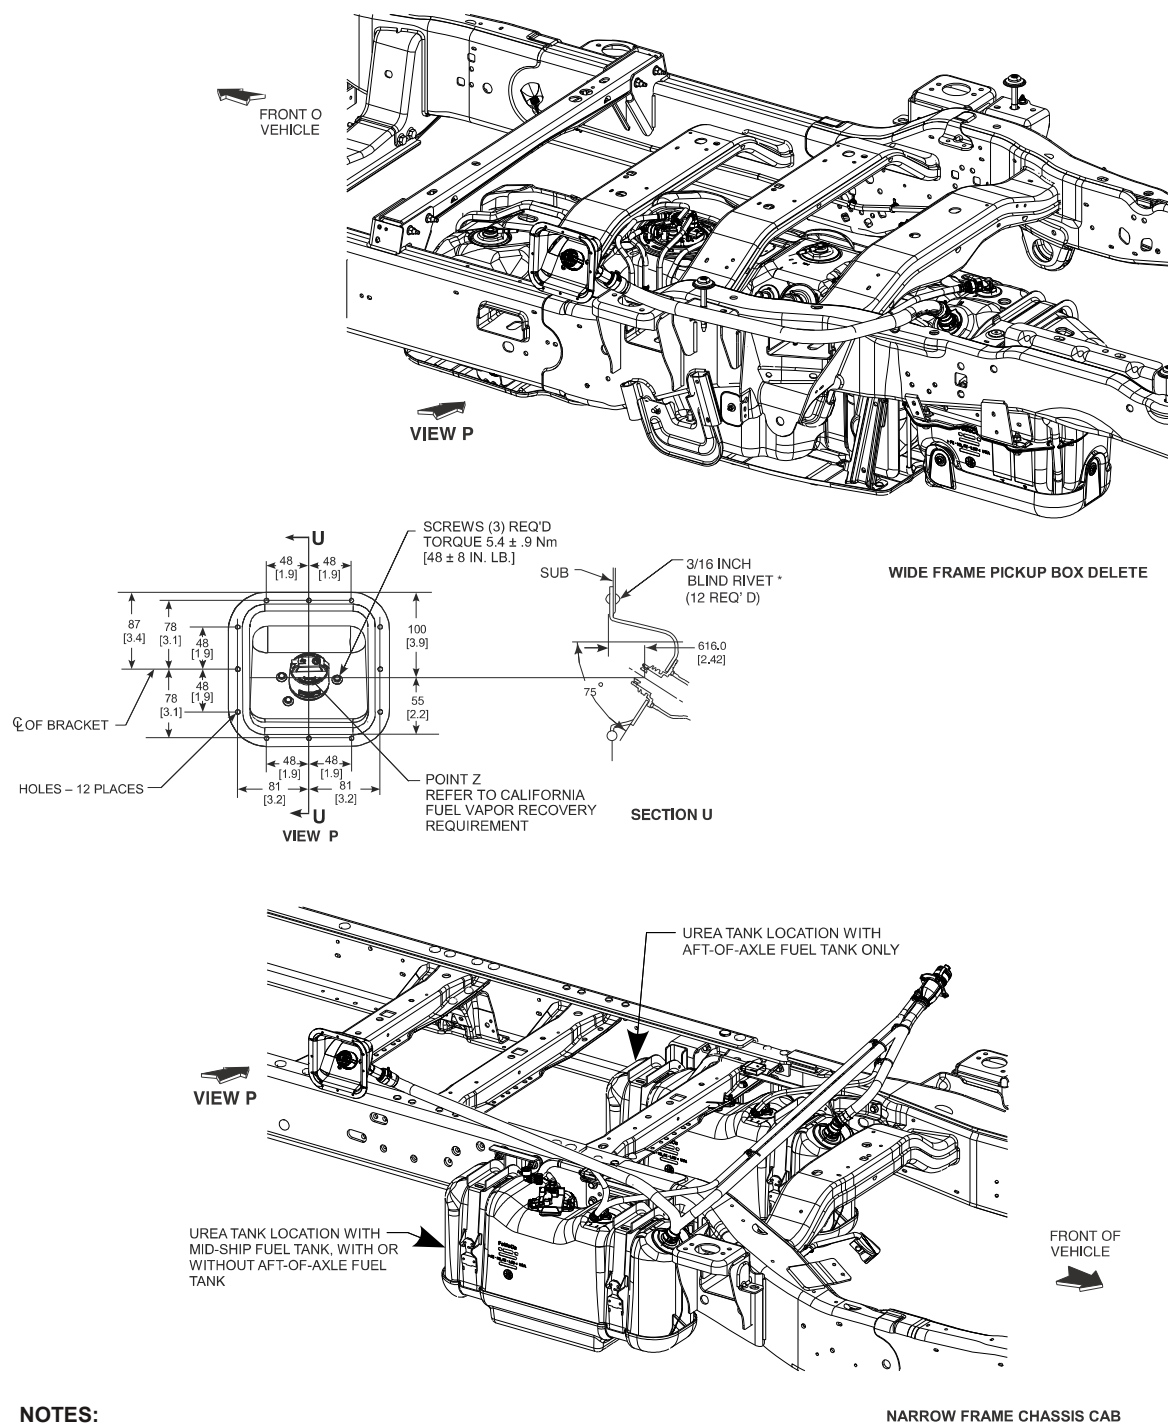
FIGURE G – SUPER DUTY F-SERIES NARROW FRAME CHASSIS CAB FUEL FILLER PIPE INSTALLATION
